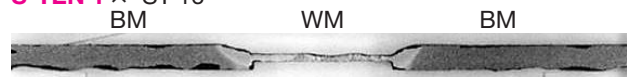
Cross Sections of Joint Specimens Immersed in Hydrochloric Acid Pickling Tank for 4 Months
